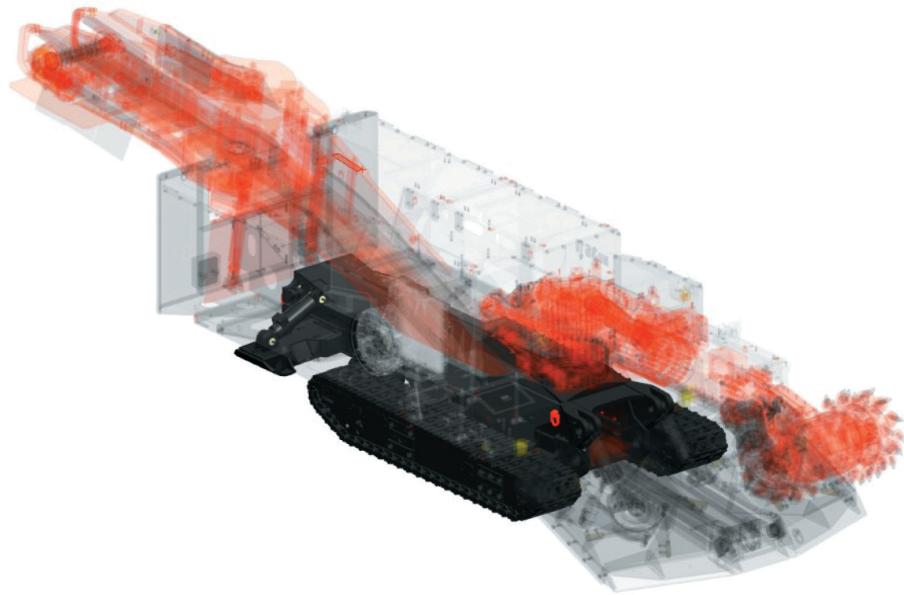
Frame and the crawler assembly of the MR341 roadheader [2]
